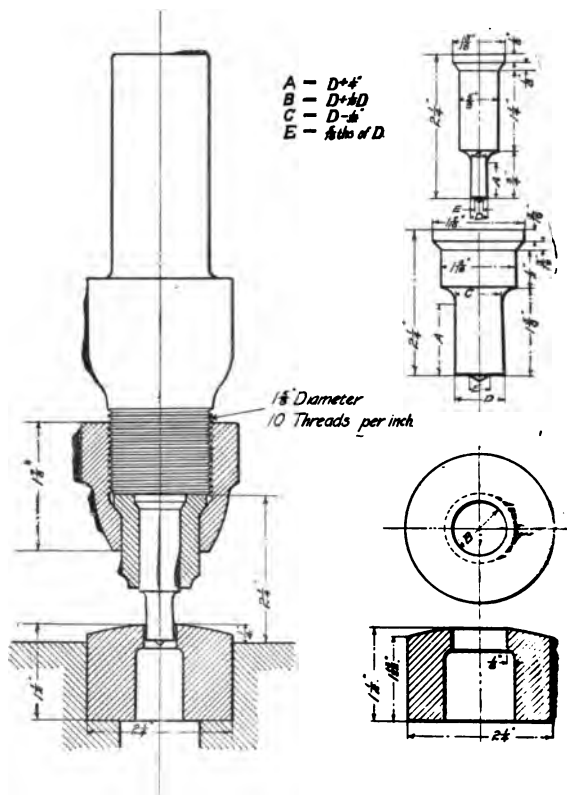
GENERAL ELEVATION AND SECTION OF STANDARD STOCKS, PUNCHES AND DIES.
